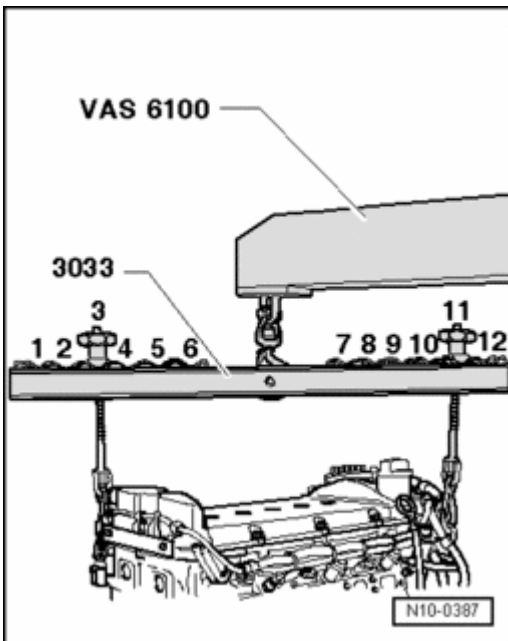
Identifying Lifting Tackle 3033 & VAS 6100
